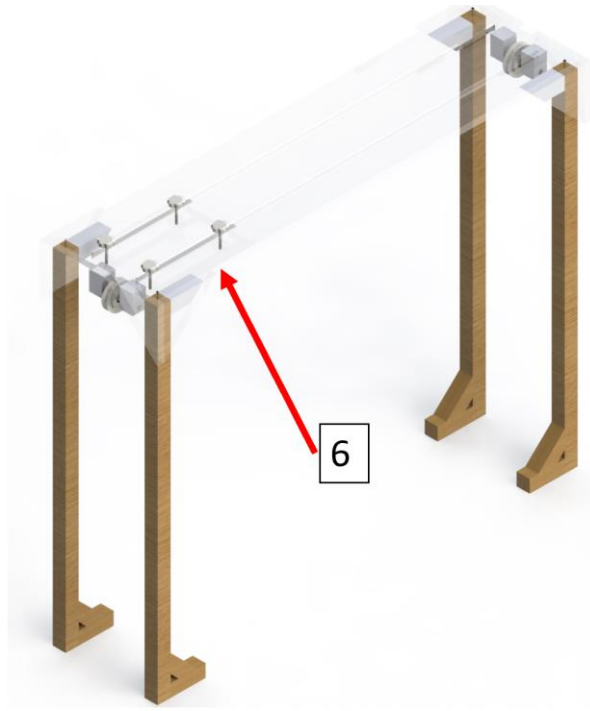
CAD Geometry of Movable Pulley Component in Top Assembly
